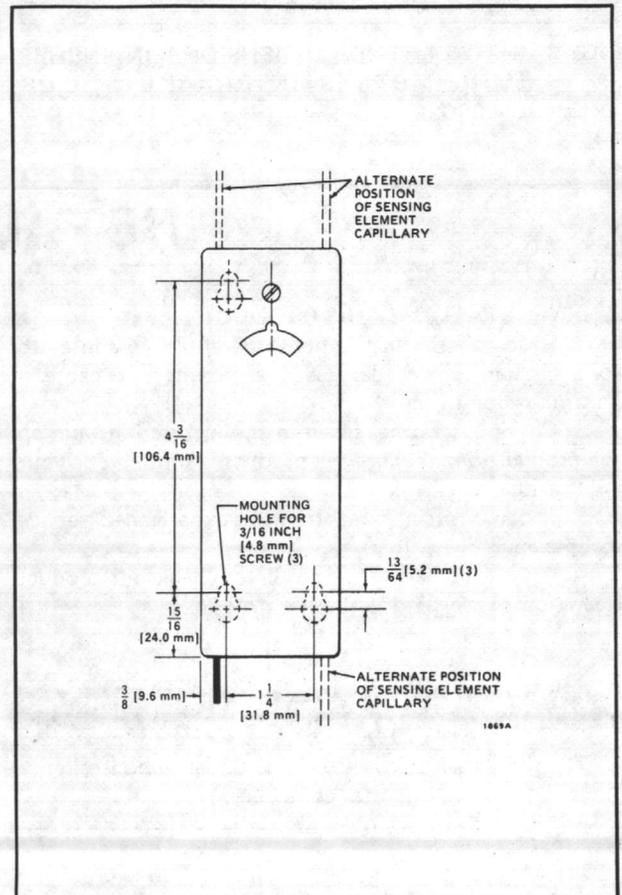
INSTALLATION DIMENSIONS FOR REMOTE BULB MODELS. OTHER DIMENSIONS SAME AS FIG. 1.
